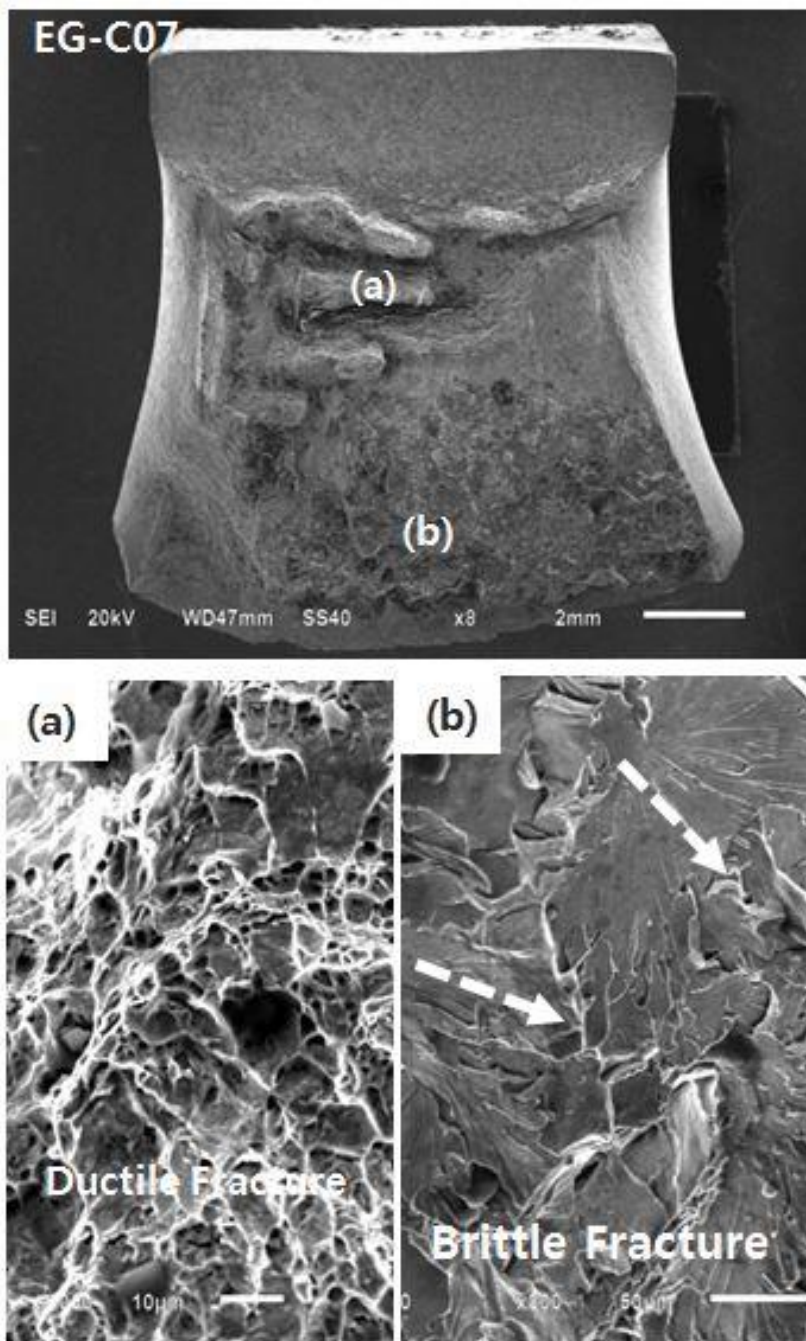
Fractographs of Charpy impact specimens fractured at 0°C for the EG-C07 fusion line specimen
